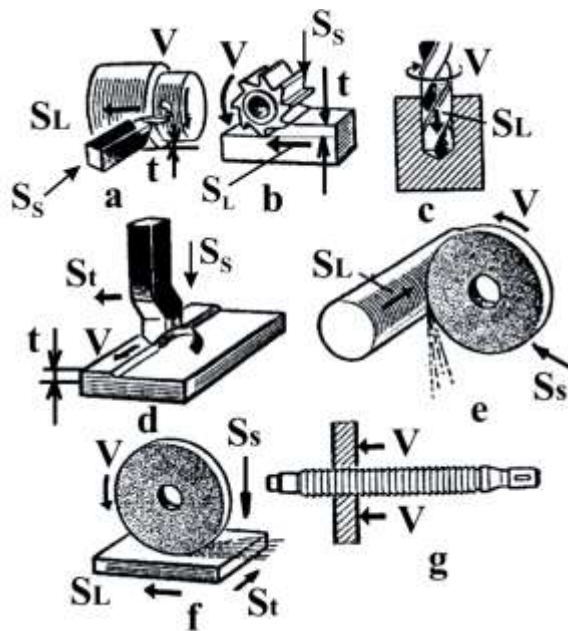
Schemes of the basic machining operations: a – turning; b - milling; c – drilling; d – planing; e, f – grinding; g – broaching
